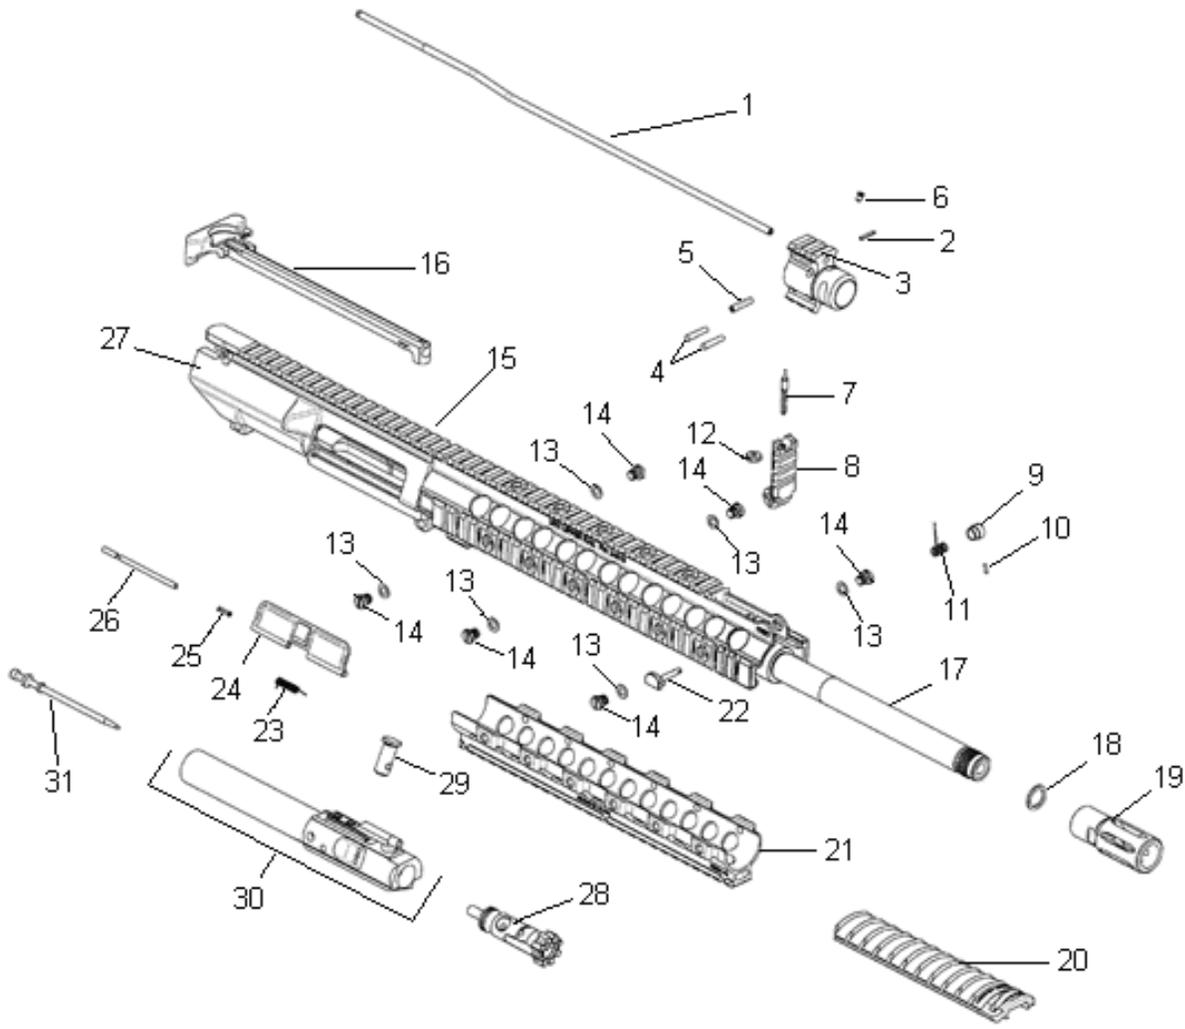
Upper Receiver, Barrel, and Gas Block Assembly – PN: 24727
